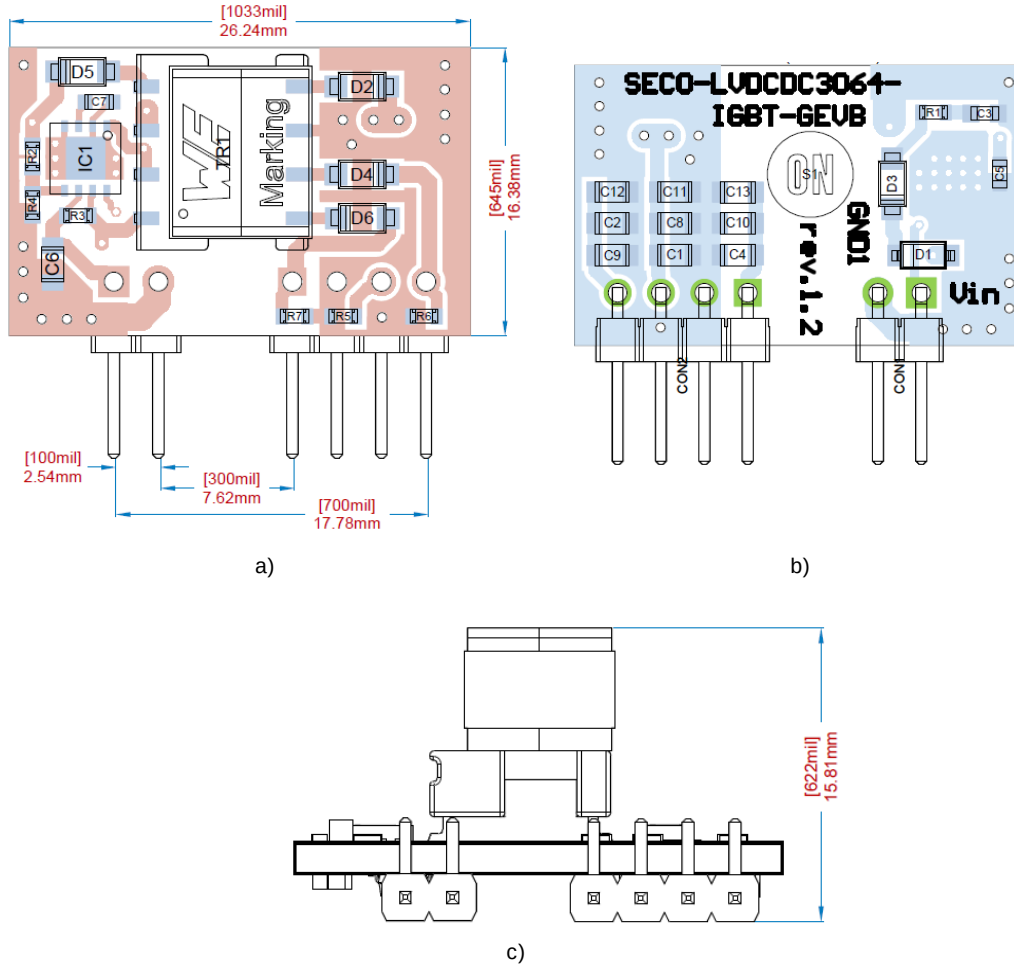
Board Layout: a) Top Side with Dimensions b) Bottom Side c) Front Side. Header is Pin Compatible with Standard DC/DC Isolated Supply Bricks.
